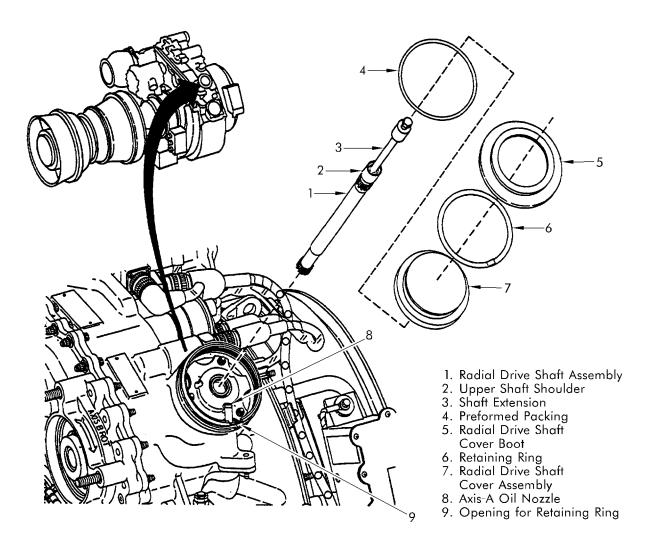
Radial Drive Shaft Assembly, Cover Boot, and Cover Assembly; Removal, Inspection, and Installation
